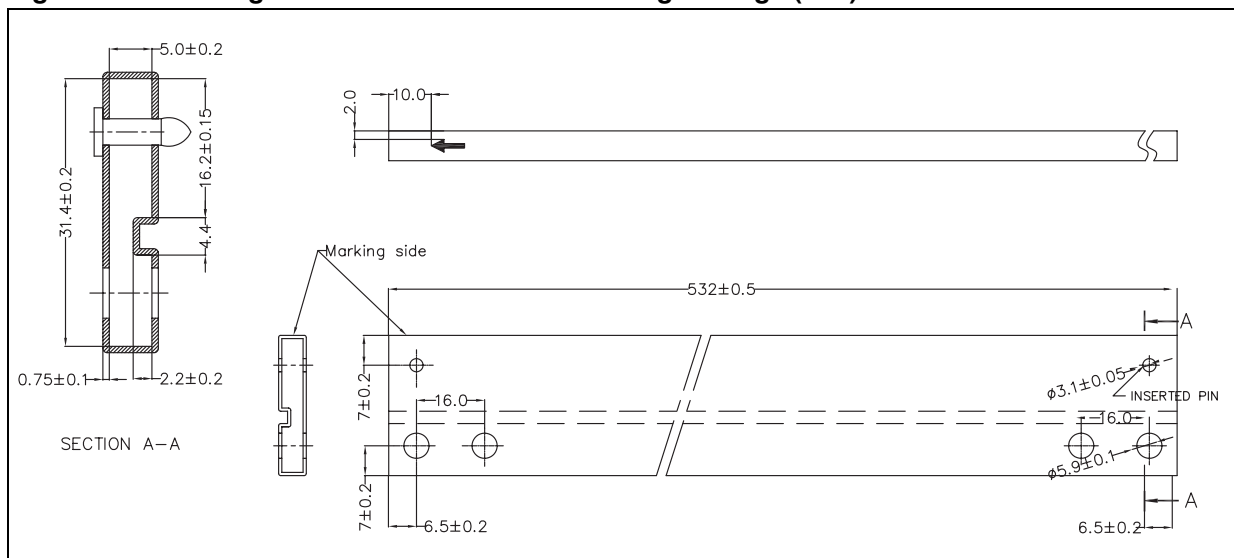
Drawing dimension tube for TO-220 Single Gauge (mm)
